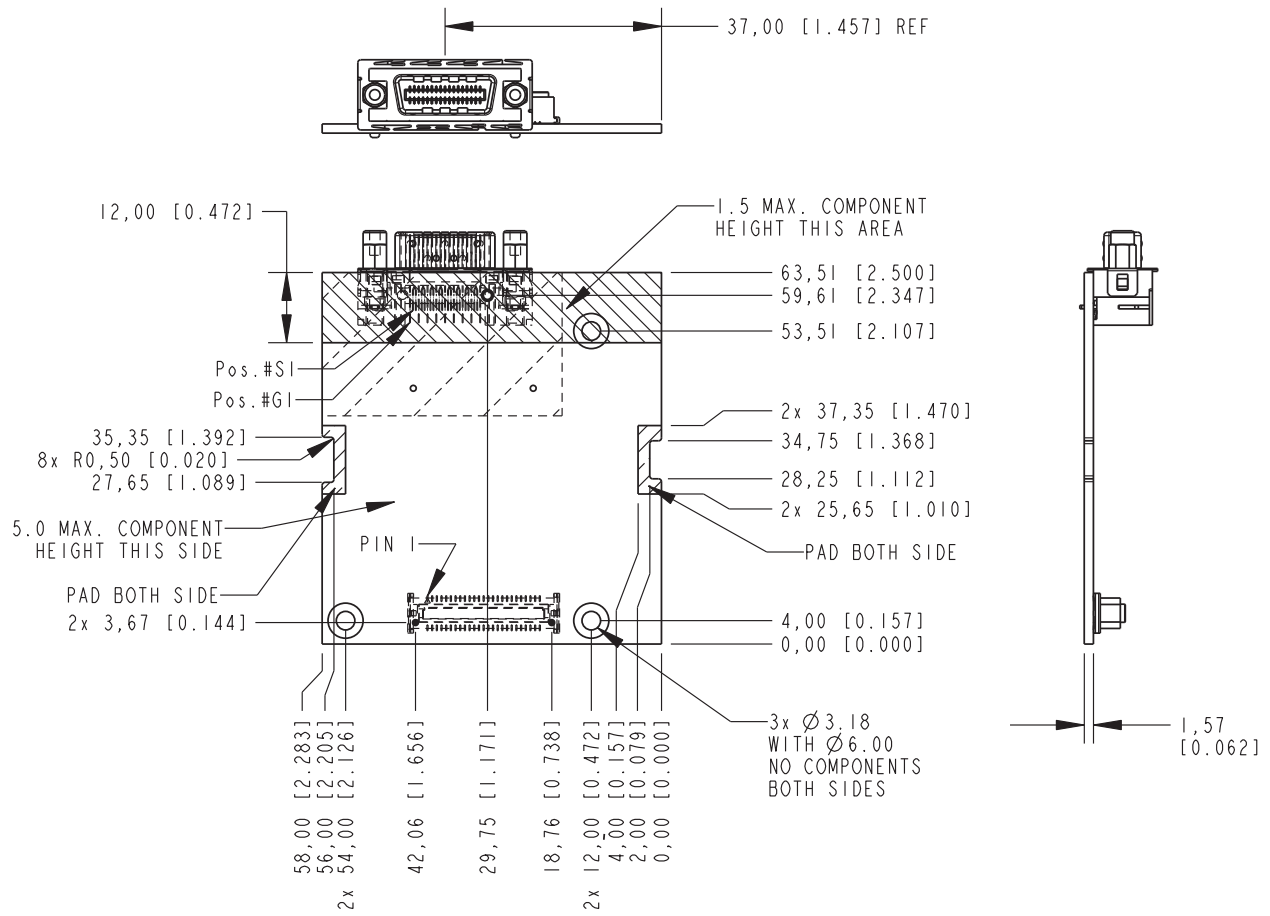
SAS I/O Module Dimensions; Top and Side Views
